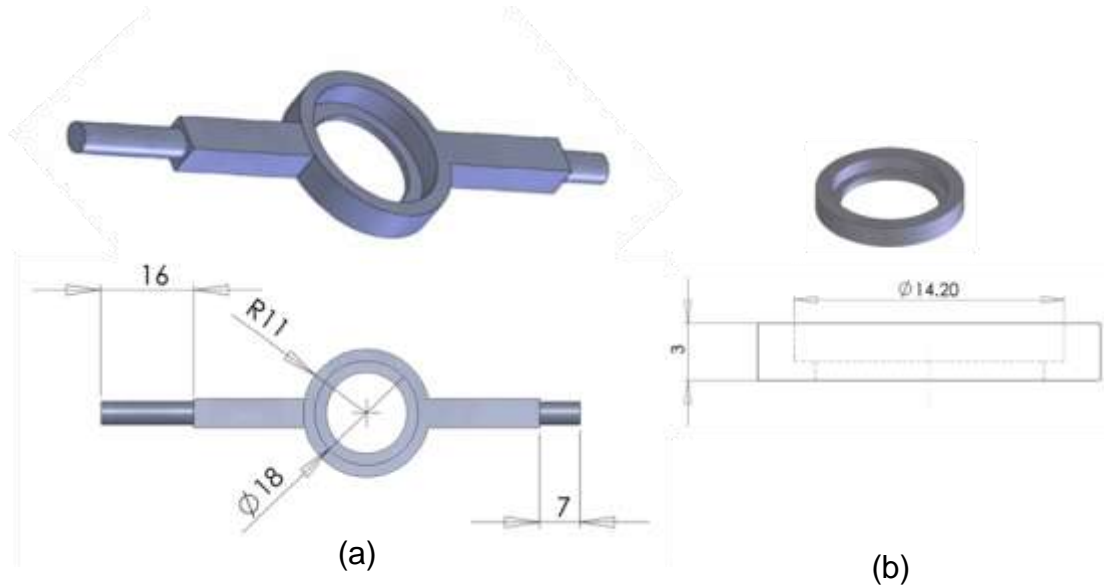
CAD schematic of (a) alternative sample holder with (b) removable fixture to accommodate disc shaped samples of 14.2mm diameter
